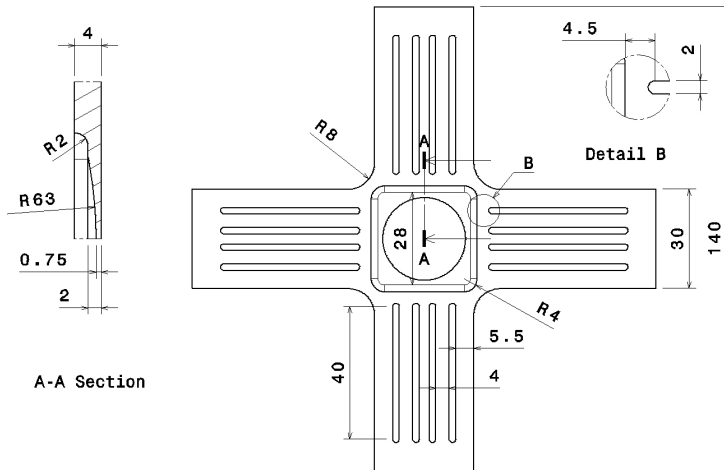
Geometry of the proposed cruciform specimen [12]
